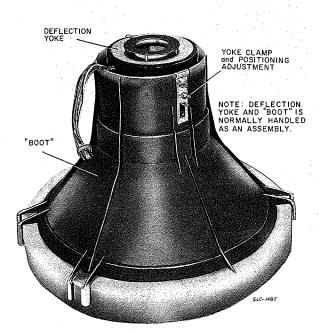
Kinescope "Boot" and Yoke Assembly.
